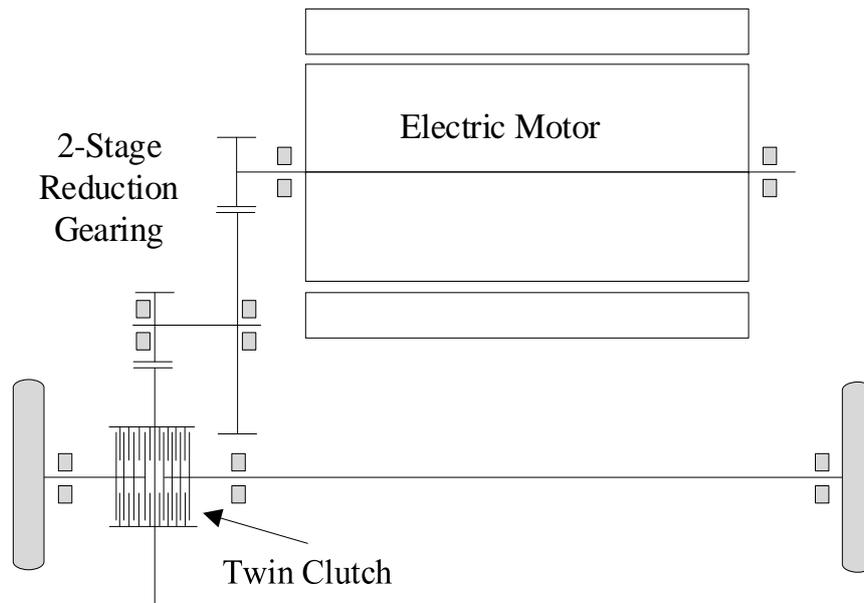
Schematic view of an E-Axle with Twin Clutch and Reduction Gearing.
